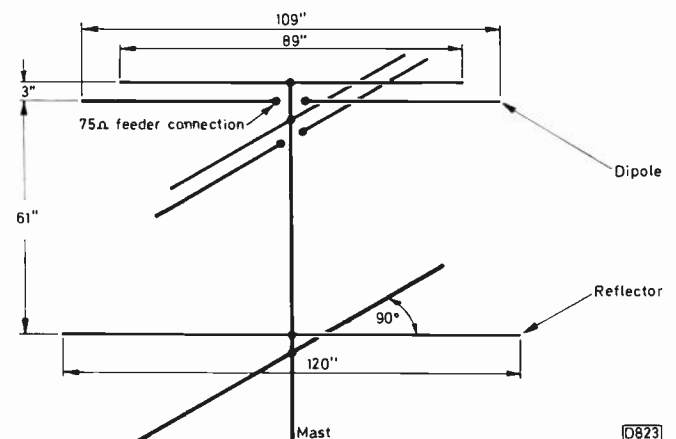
Exploded view. The two arrays have the same dimensions and are mounted at 90° to each other – the dimensions given are for a wideband (48-68MHz) version.
